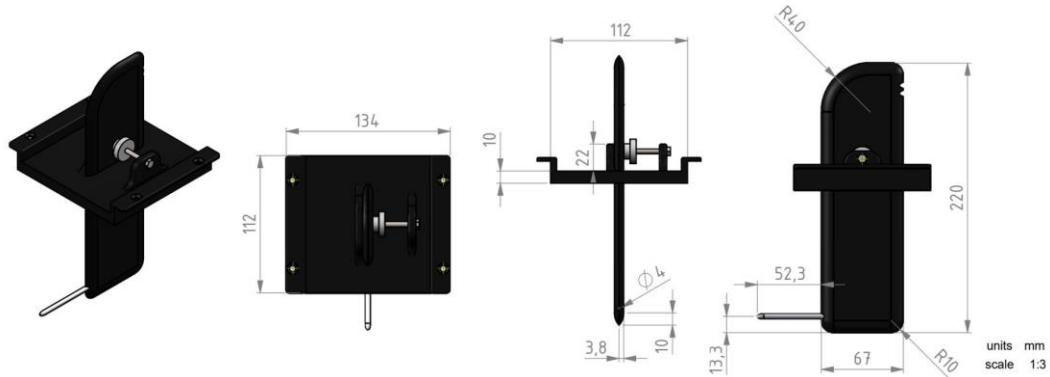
The removable and height-adjustable pitot tube holders in the removable erosion zone hatches
